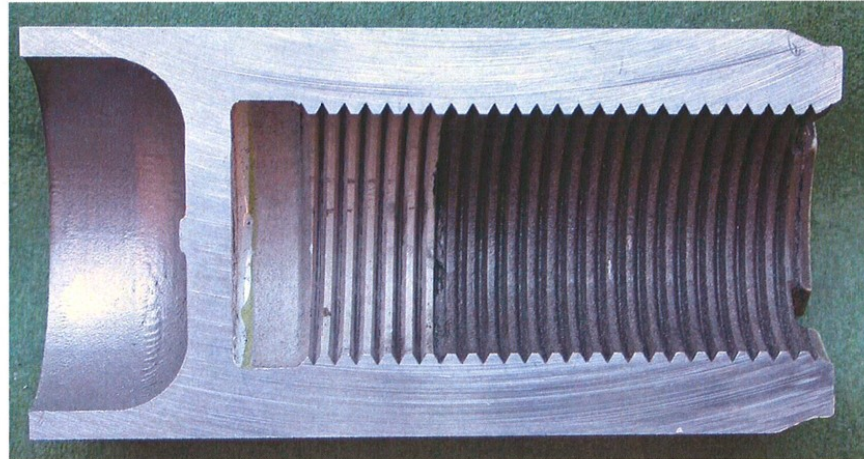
Close-up view of female threads of left hand actuator piston rod after cleaning in solvents and detergents with ultrasonic agitation.
